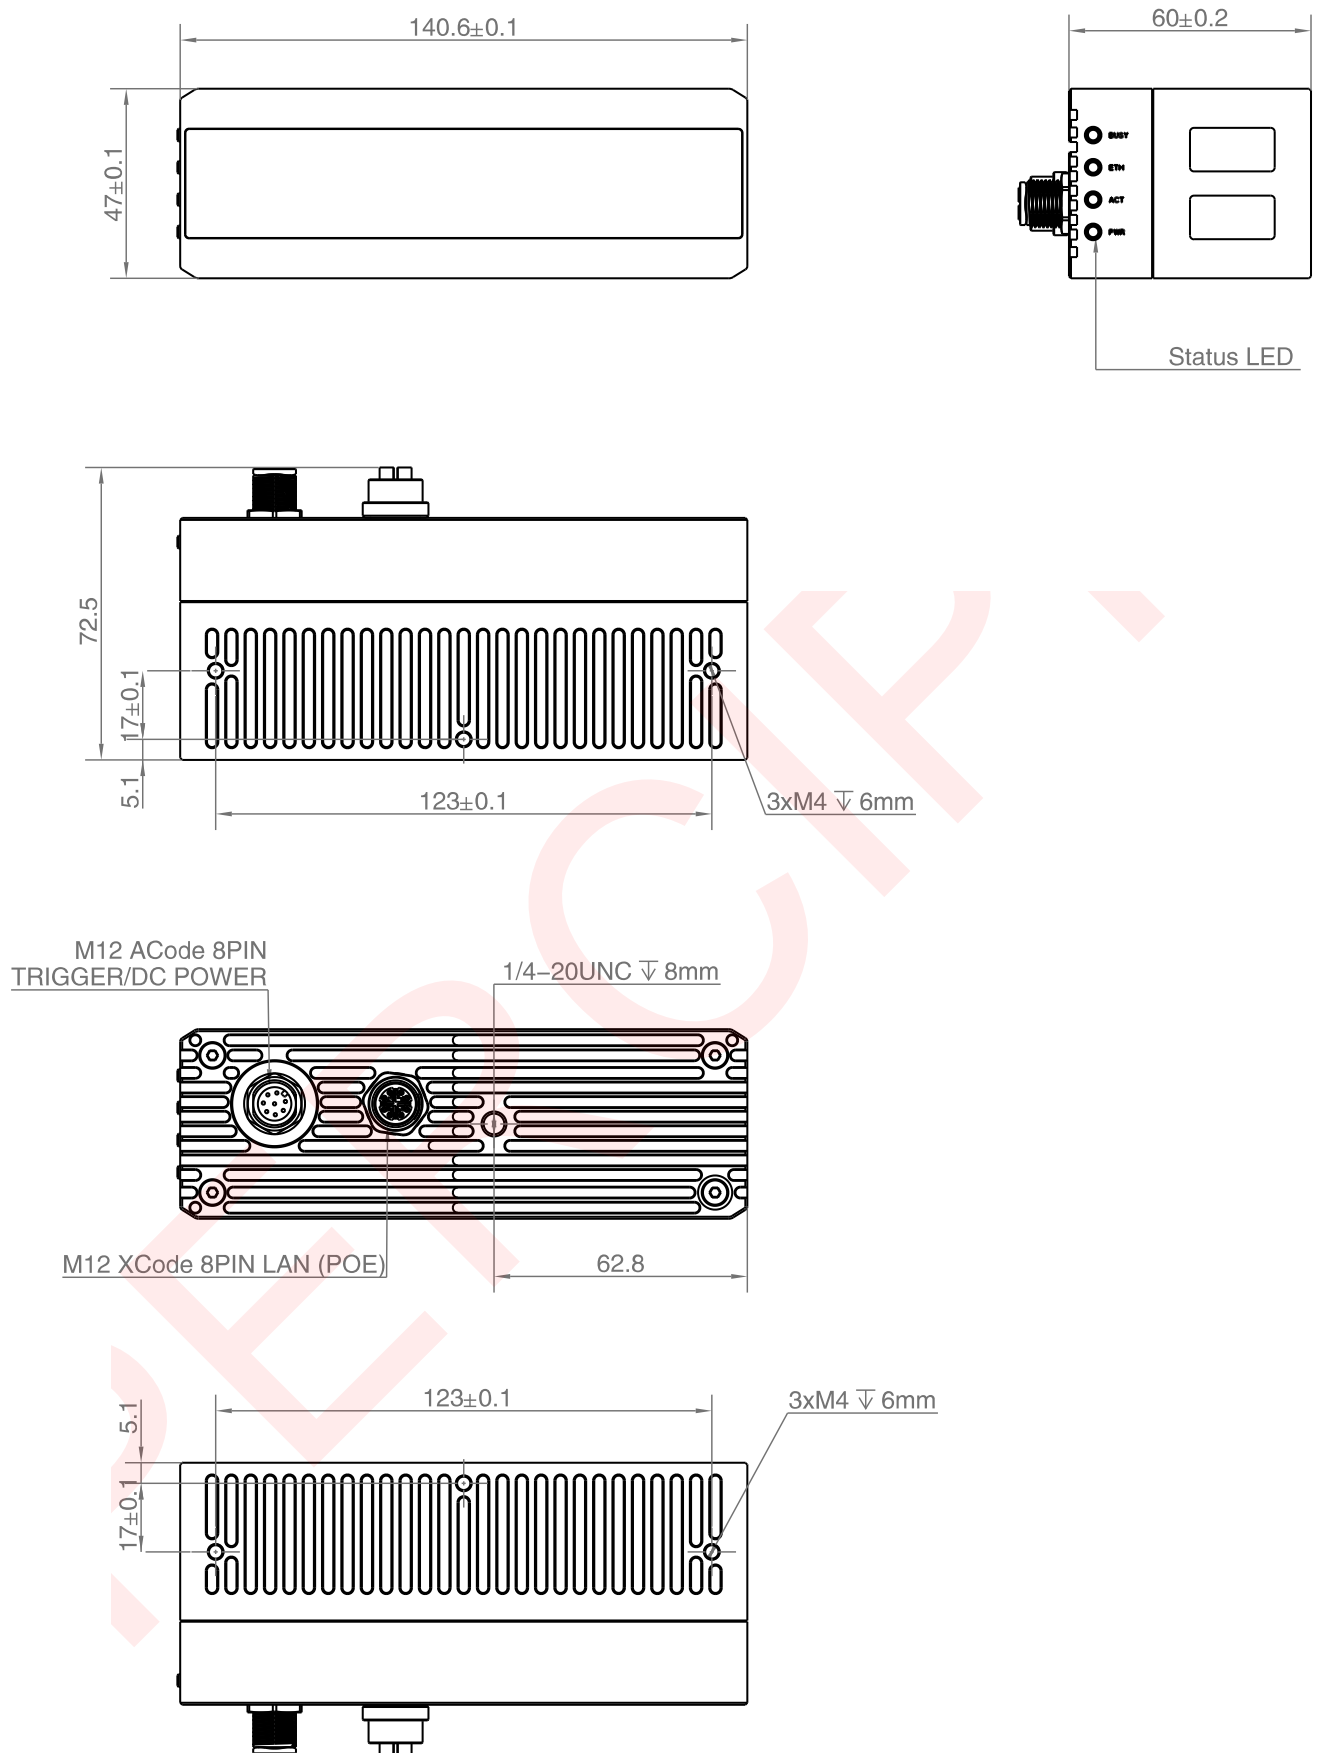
PS800-E1 Mechanical dimensions (unit: mm)
